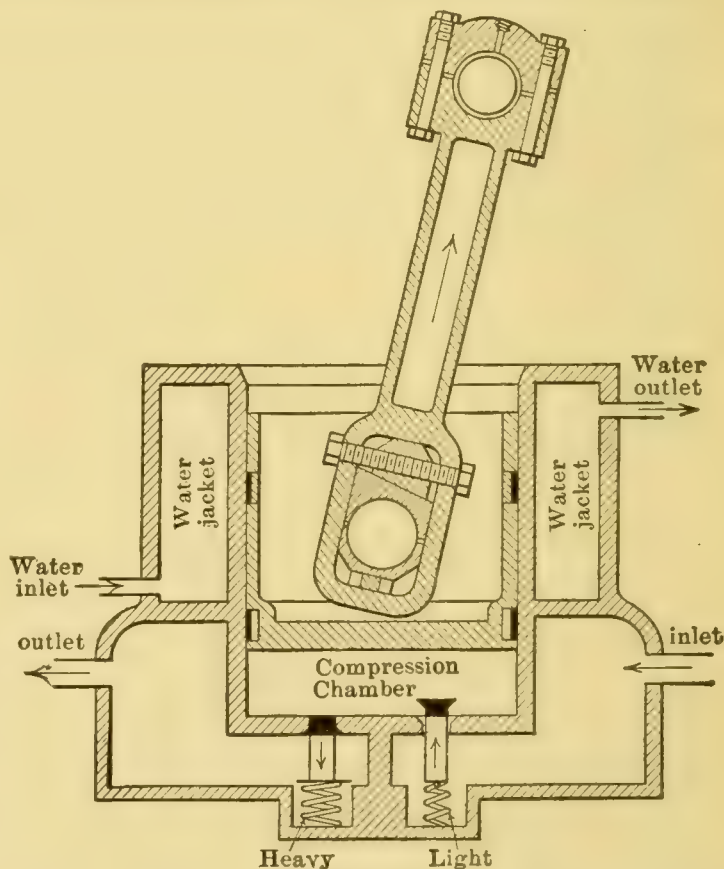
SECTION OF ONE CYLINDER OF AIR COMPRESSOR.
